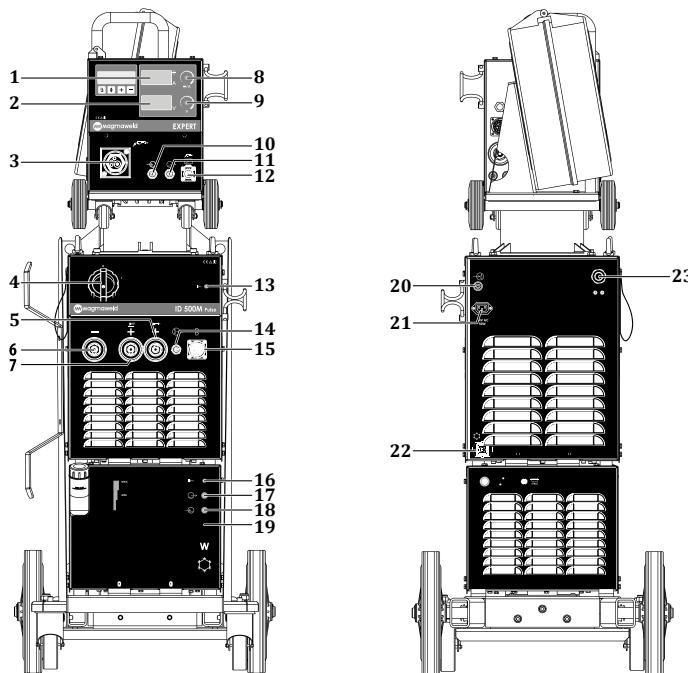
ID 500 MW PULSE EXPERT Front and Rear View
